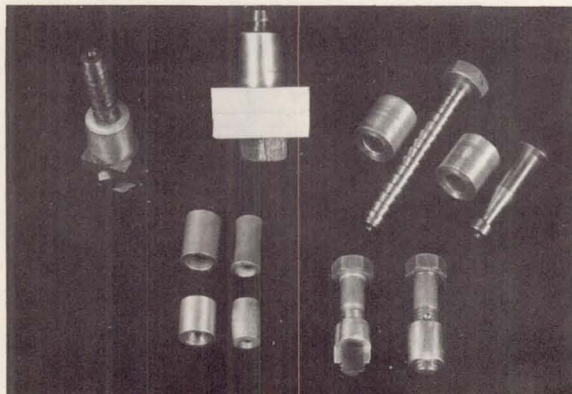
Magnetically formed fasteners. (Marshall Space Flight Center.)
